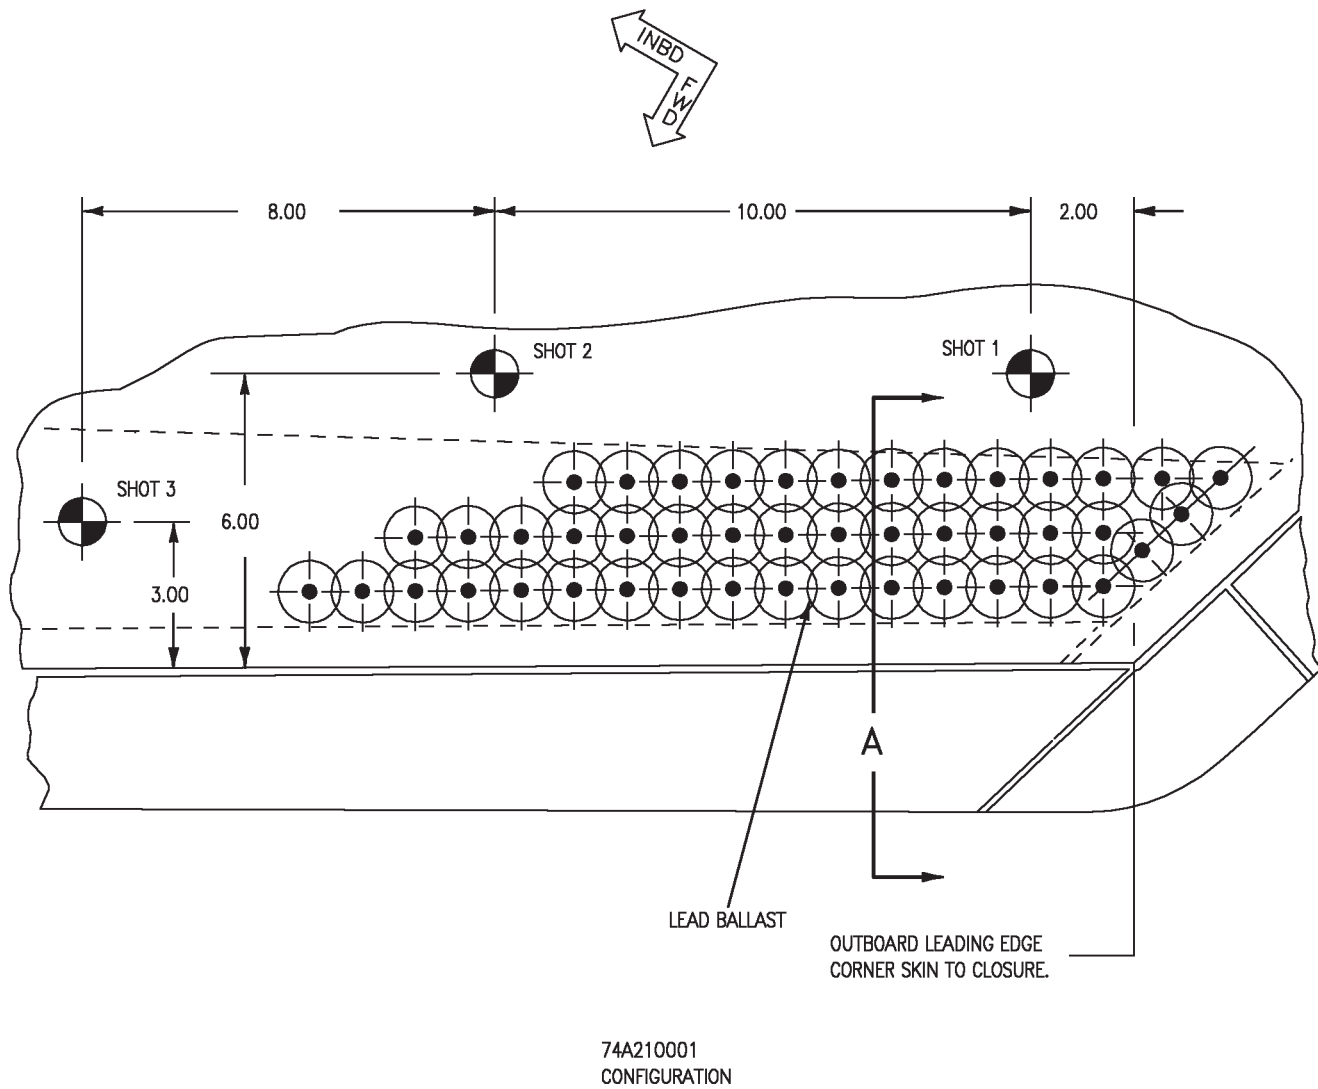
X-Ray Setup for Honeycomb Core Inspection and Locating Ballast (Sheet 2)
